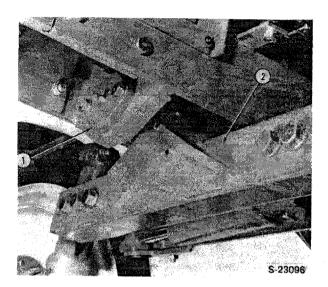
Front Axle Pivot - 2 WD 1. Support Assembly 2. Axle Assembly
